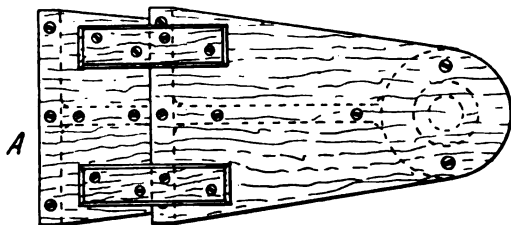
Illustrates the Extension of a Bracket Pattern by a new foot *A*, battened on, the battens and original foot to be stopped off.
